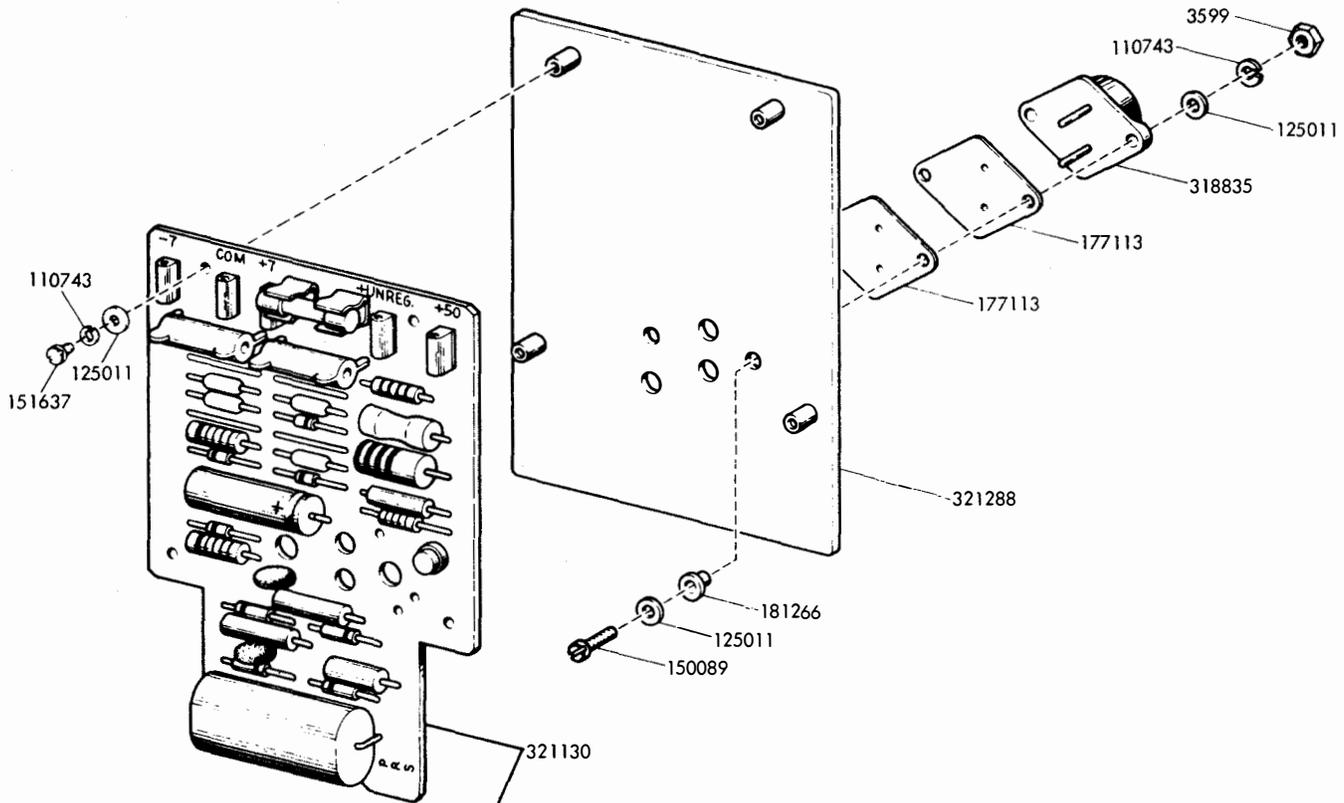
Electrical Service Assembly 326792 - Used with Mini TD Set (Sheet 2 of 2)
